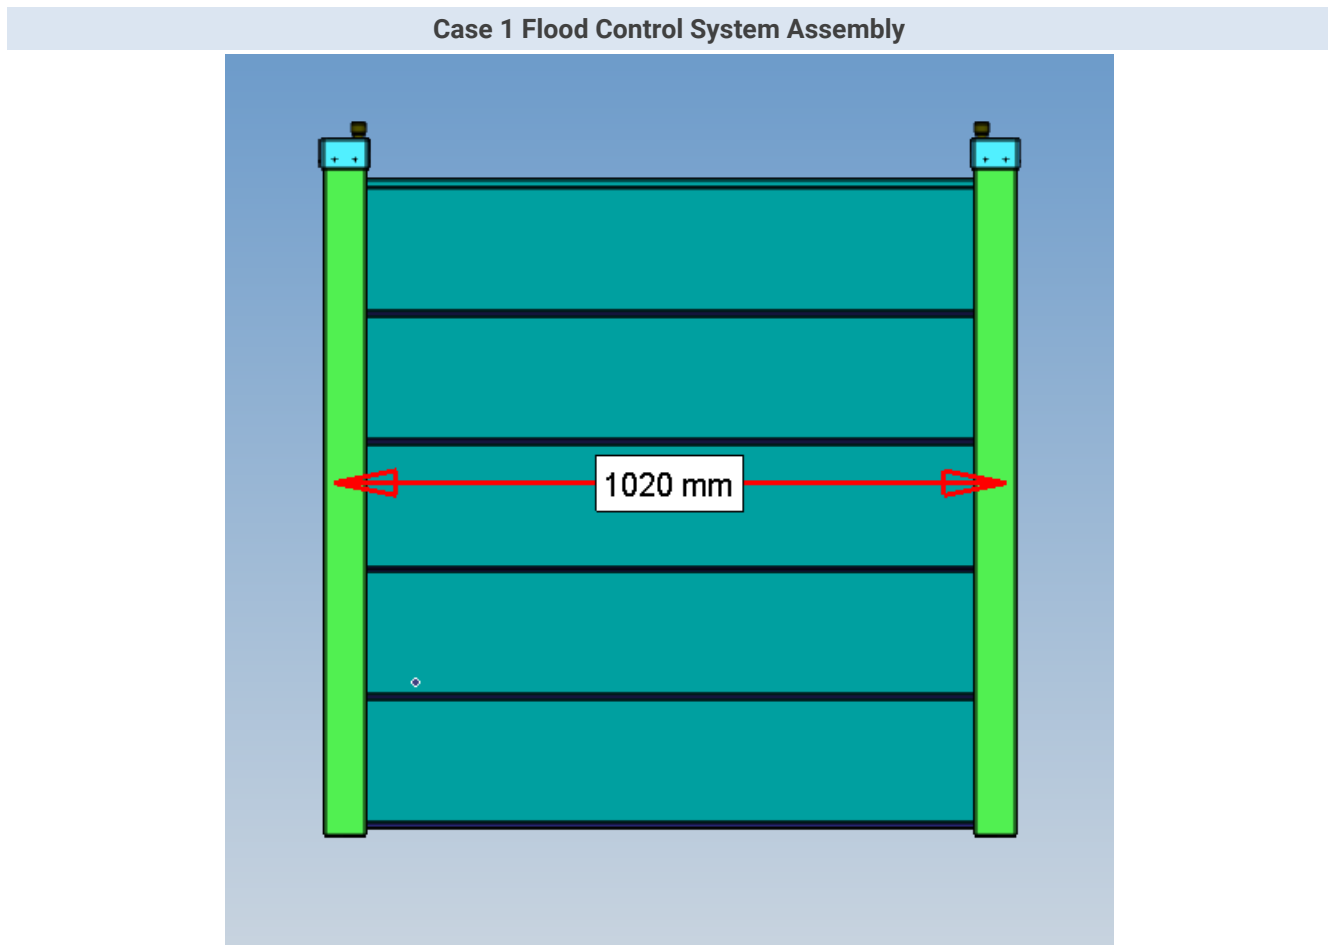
Assembly of Case 1 system for inside mounting of 1020 mm wide door
